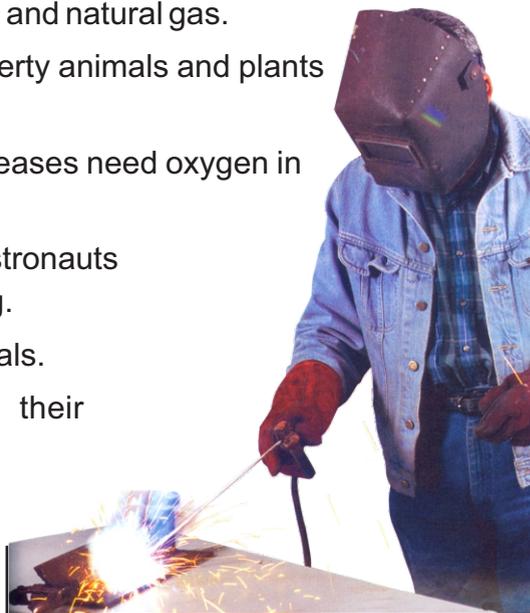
Oxygen is used in the flame of welding.
